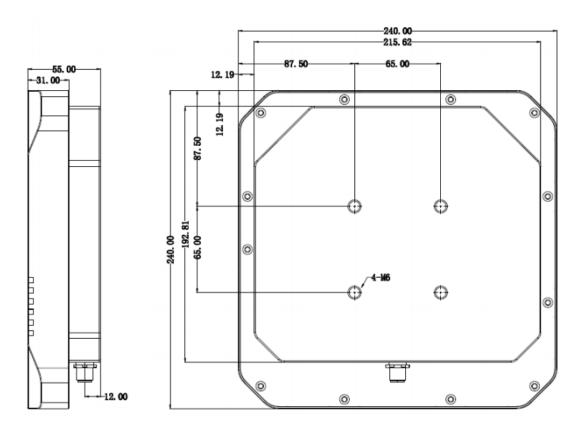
SG-UR-I83 Mechanical Dimensios (Unit mm)
